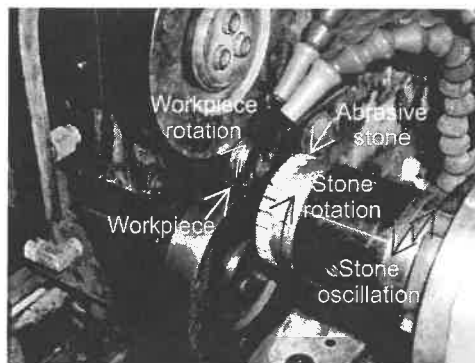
Centerless flat superfinishing using a straight cup-shaped abrasive stone.
